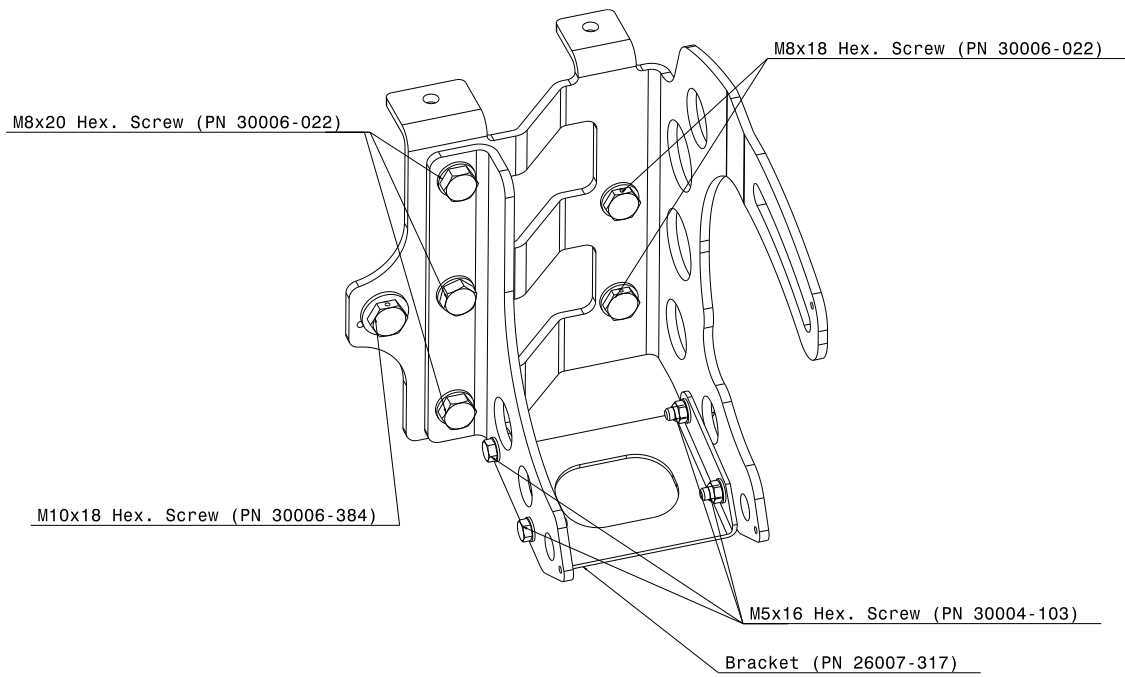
Isometric view Side Frames right hand side 300A 915iS
